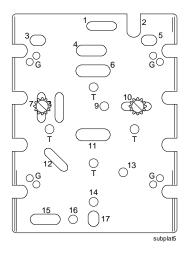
Subplate for Later Style Wallbox Joint and Mortar Joint
